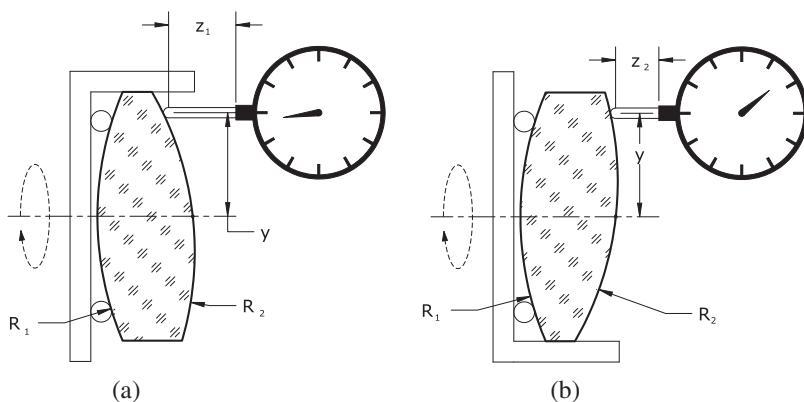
Axial runout measurement technique at two different positions showing how the axial runout is measured.
